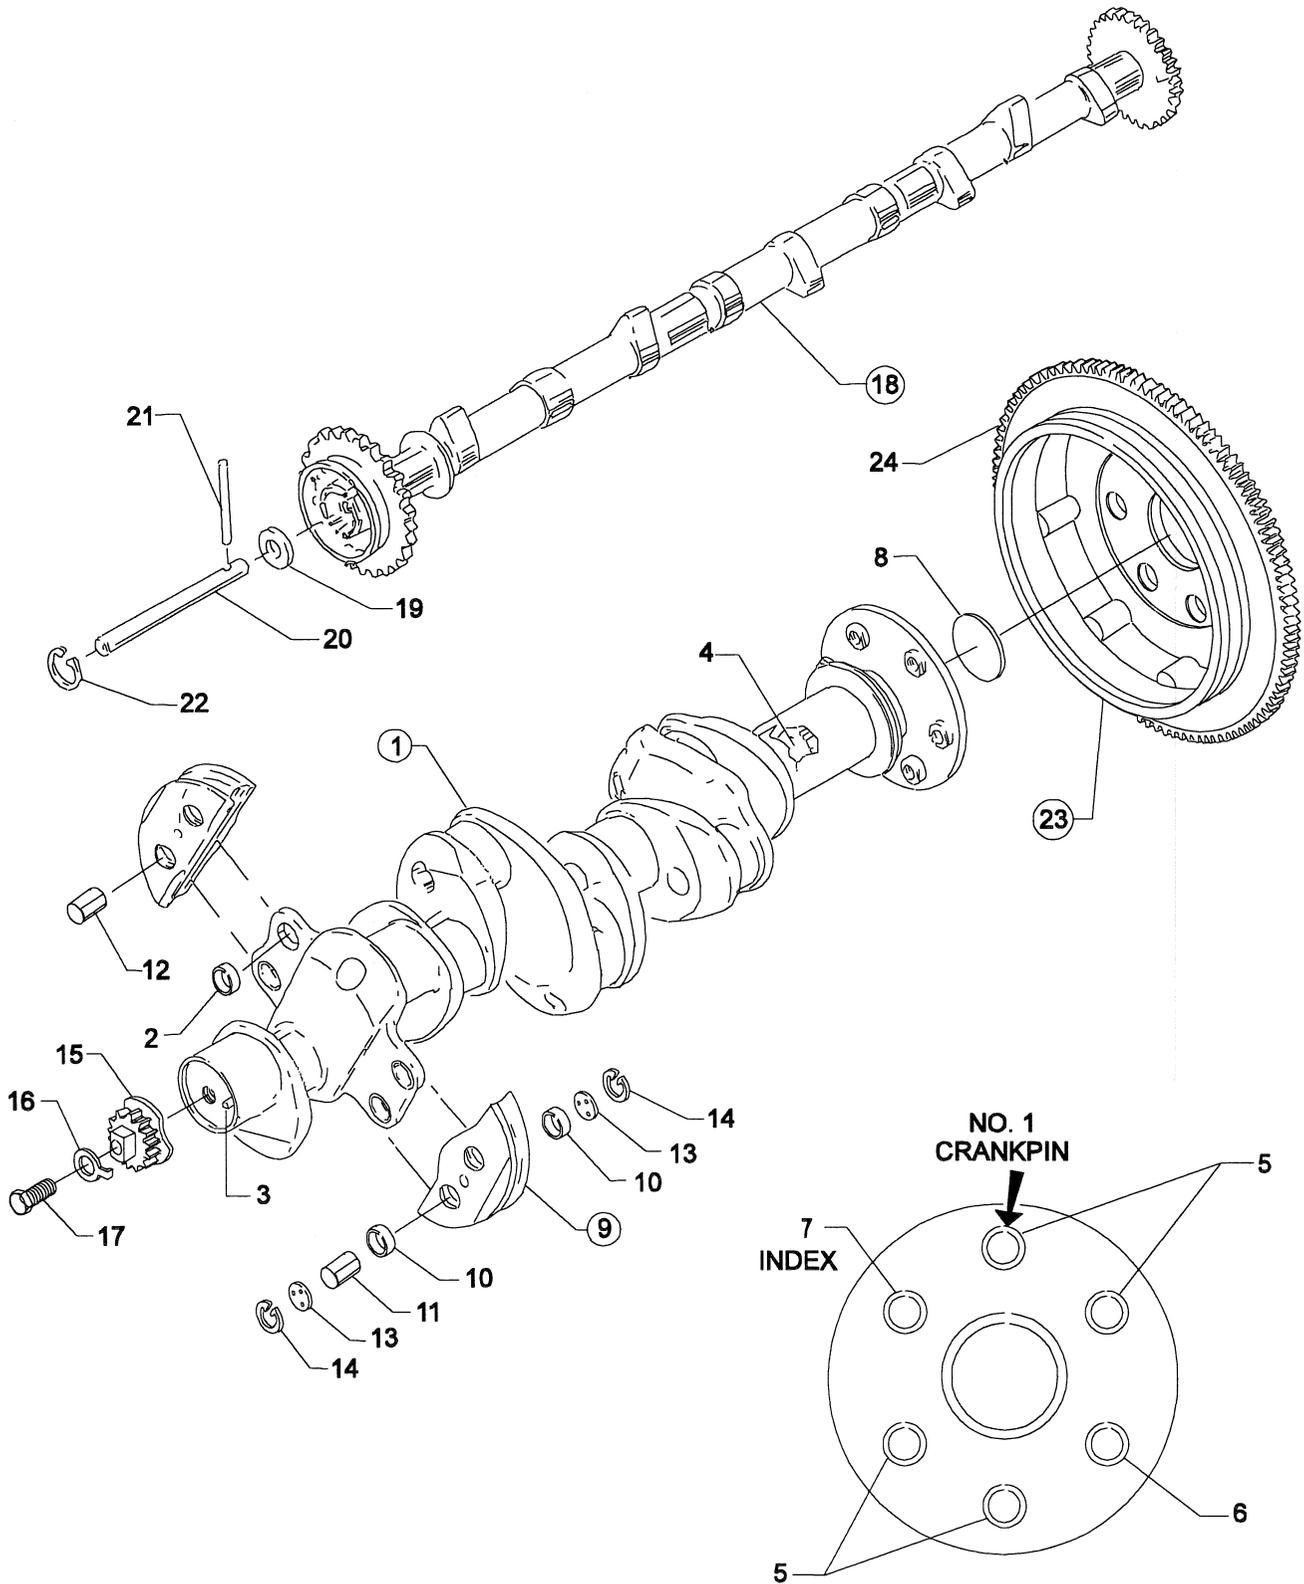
CAMSHAFT, CRANKSHAFT AND RELATED PARTS
